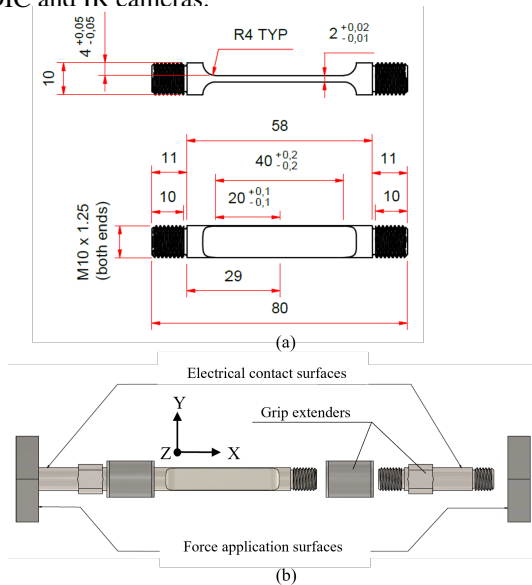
(a) Gleeble tensile specimen geometry (mm). (b) Partially exploded view of the tensile loading train including grip extenders showing locations of force and electrical contact and testing coordinate system.
